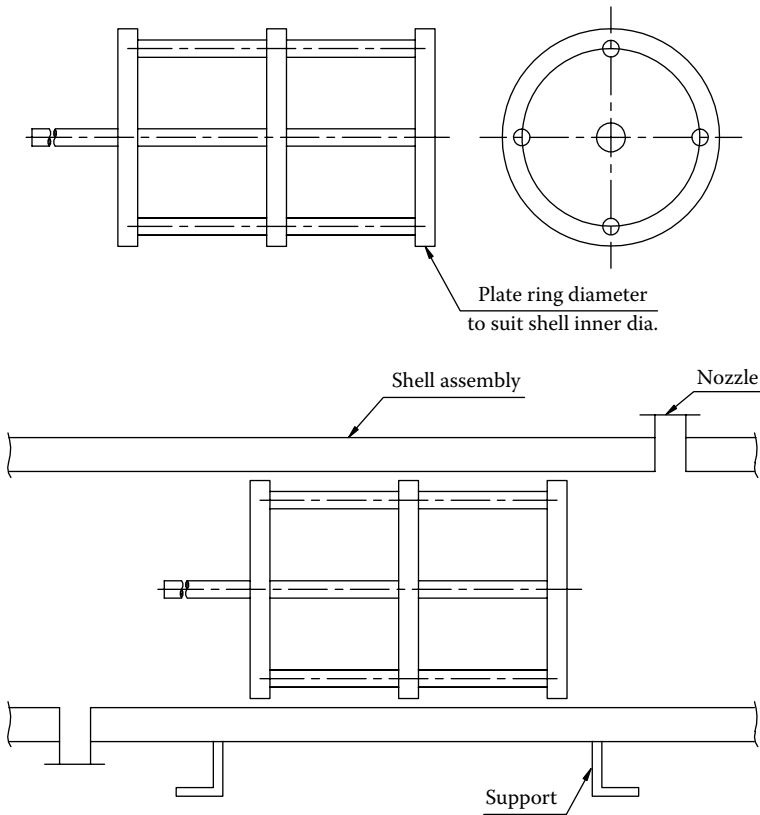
Pull-through gauge to check the circularity of heat exchanger shell. (a) Schematic and (b) gauge passing through the shell assembly.
